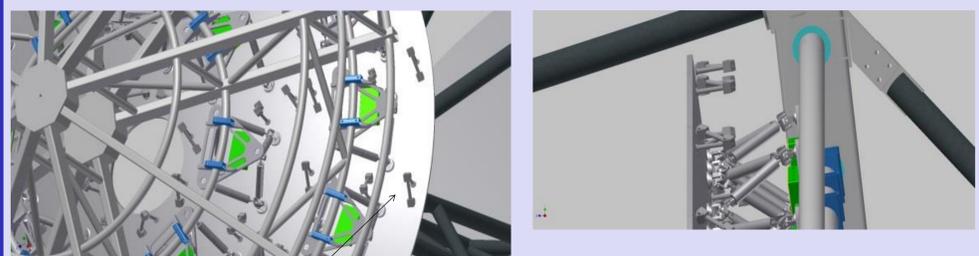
(left) Mirror mounting on the secondary. The green triangle bases and edge sensors are shown. (right) Side view of mirror mounting to the primary.
